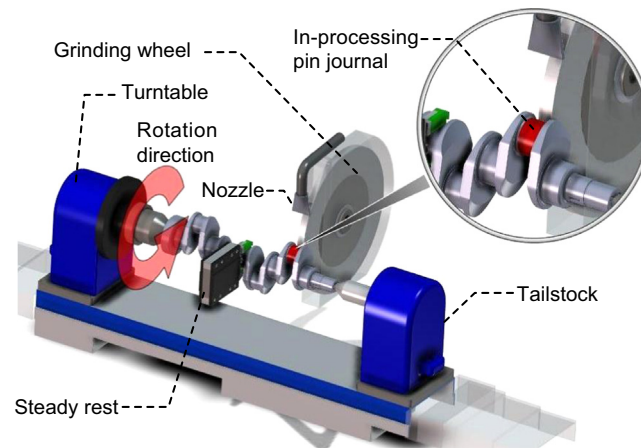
Demonstration of pin chasing grinding in an oscillating grinding machine.
